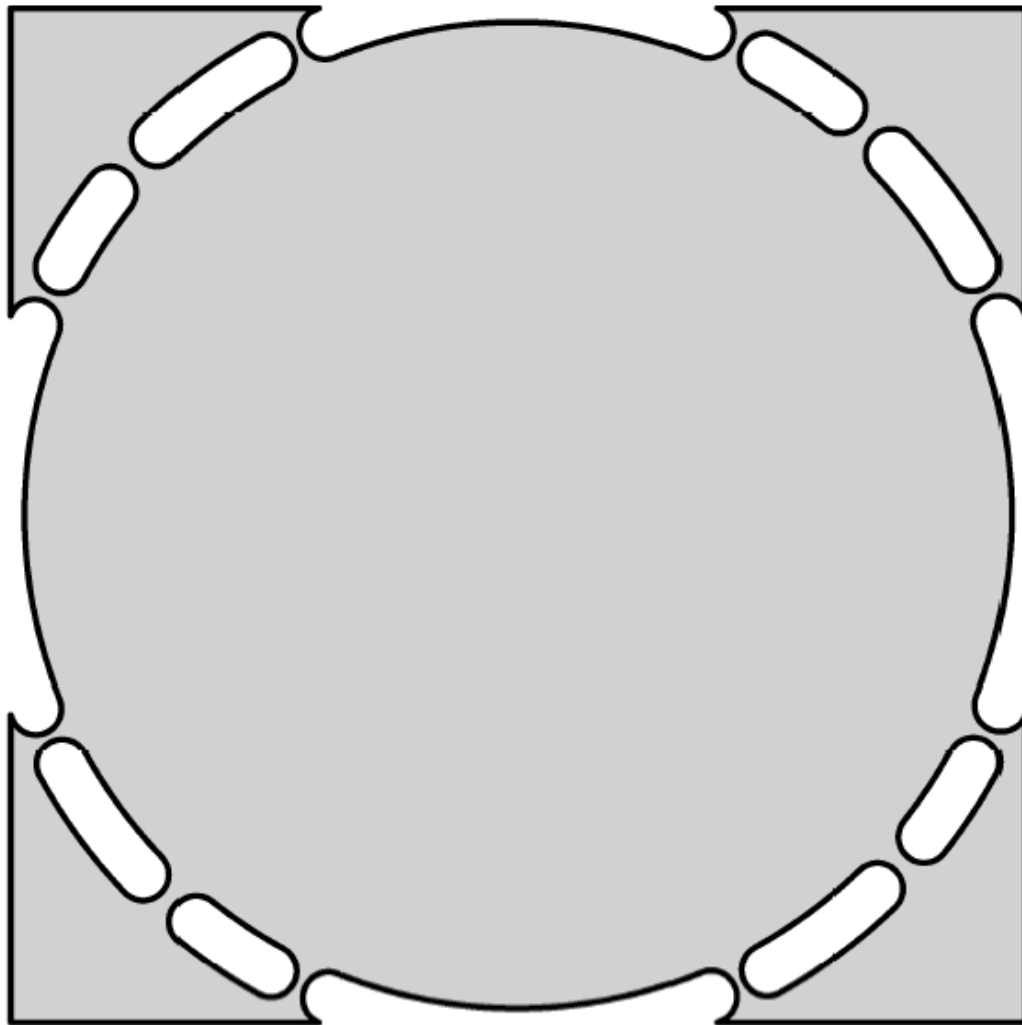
Workpiece similar to Figure 5, using tabs instead of onion skinning.
